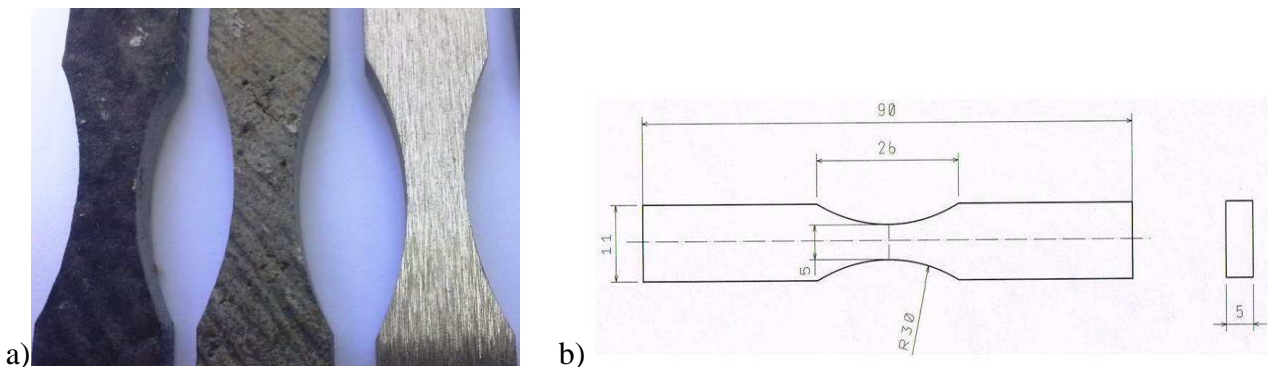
a) Surface condition of specimens (from left) as-cast, sand blast and fine ground b) dimensions of specimens.
